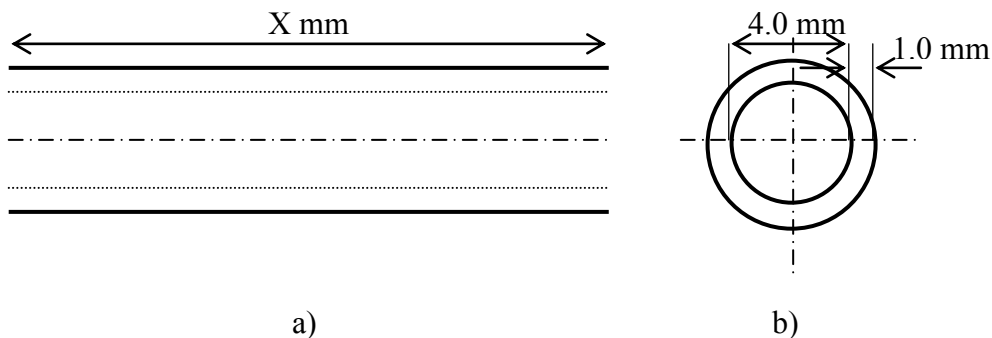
Tuner length test construction a) longitudinal cross-section b) end view
